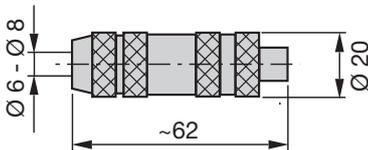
Connector BKS-S105-00 (pin) for BUS OUT
